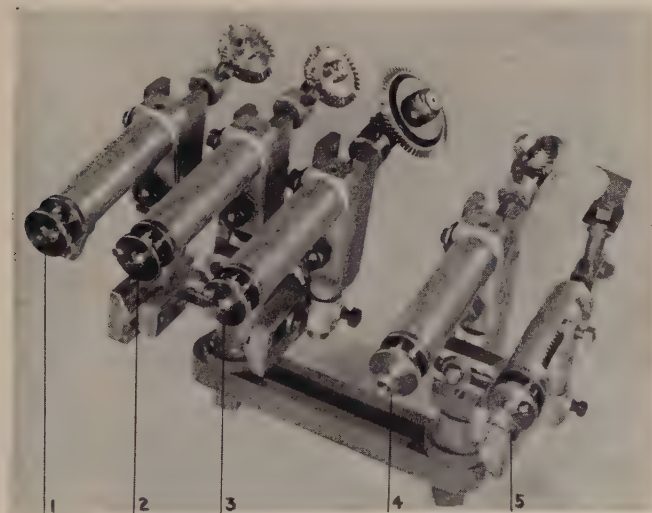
Arrangement for single plush with double backing: (1) plush feeder; (2) plush feeder; (3) sinker bur; (4) sinker bur; (5) presser.
